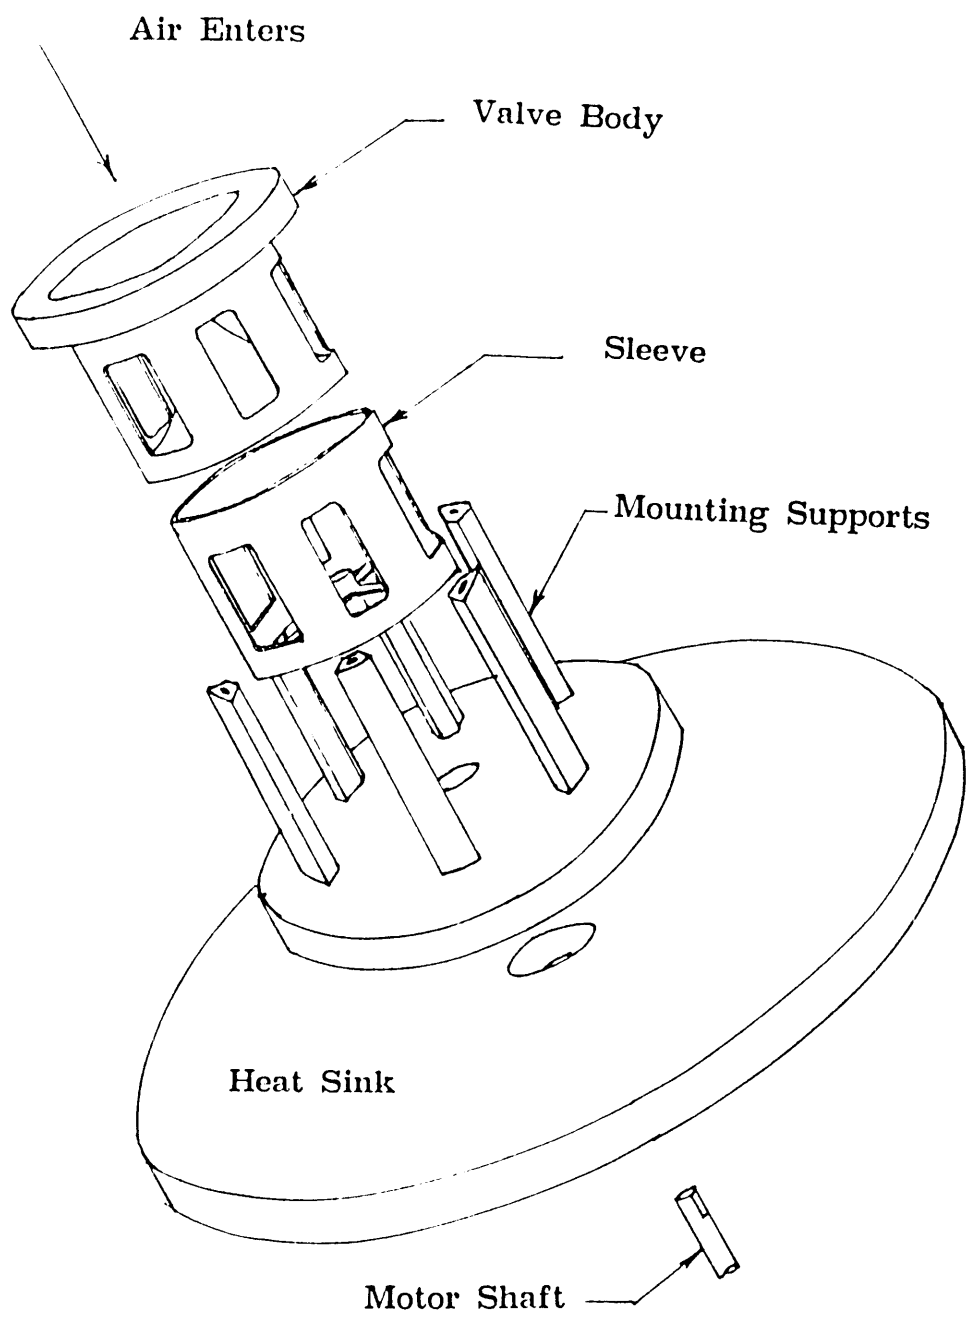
Exploded View of Rotary Actuated Control Valve
